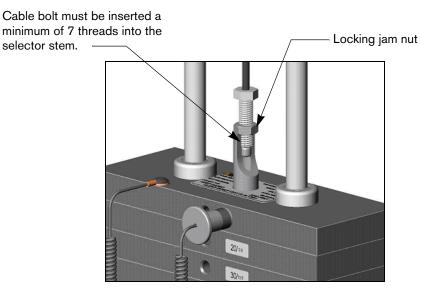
Cable bolt must have a minimum of seven threads into selector stem
